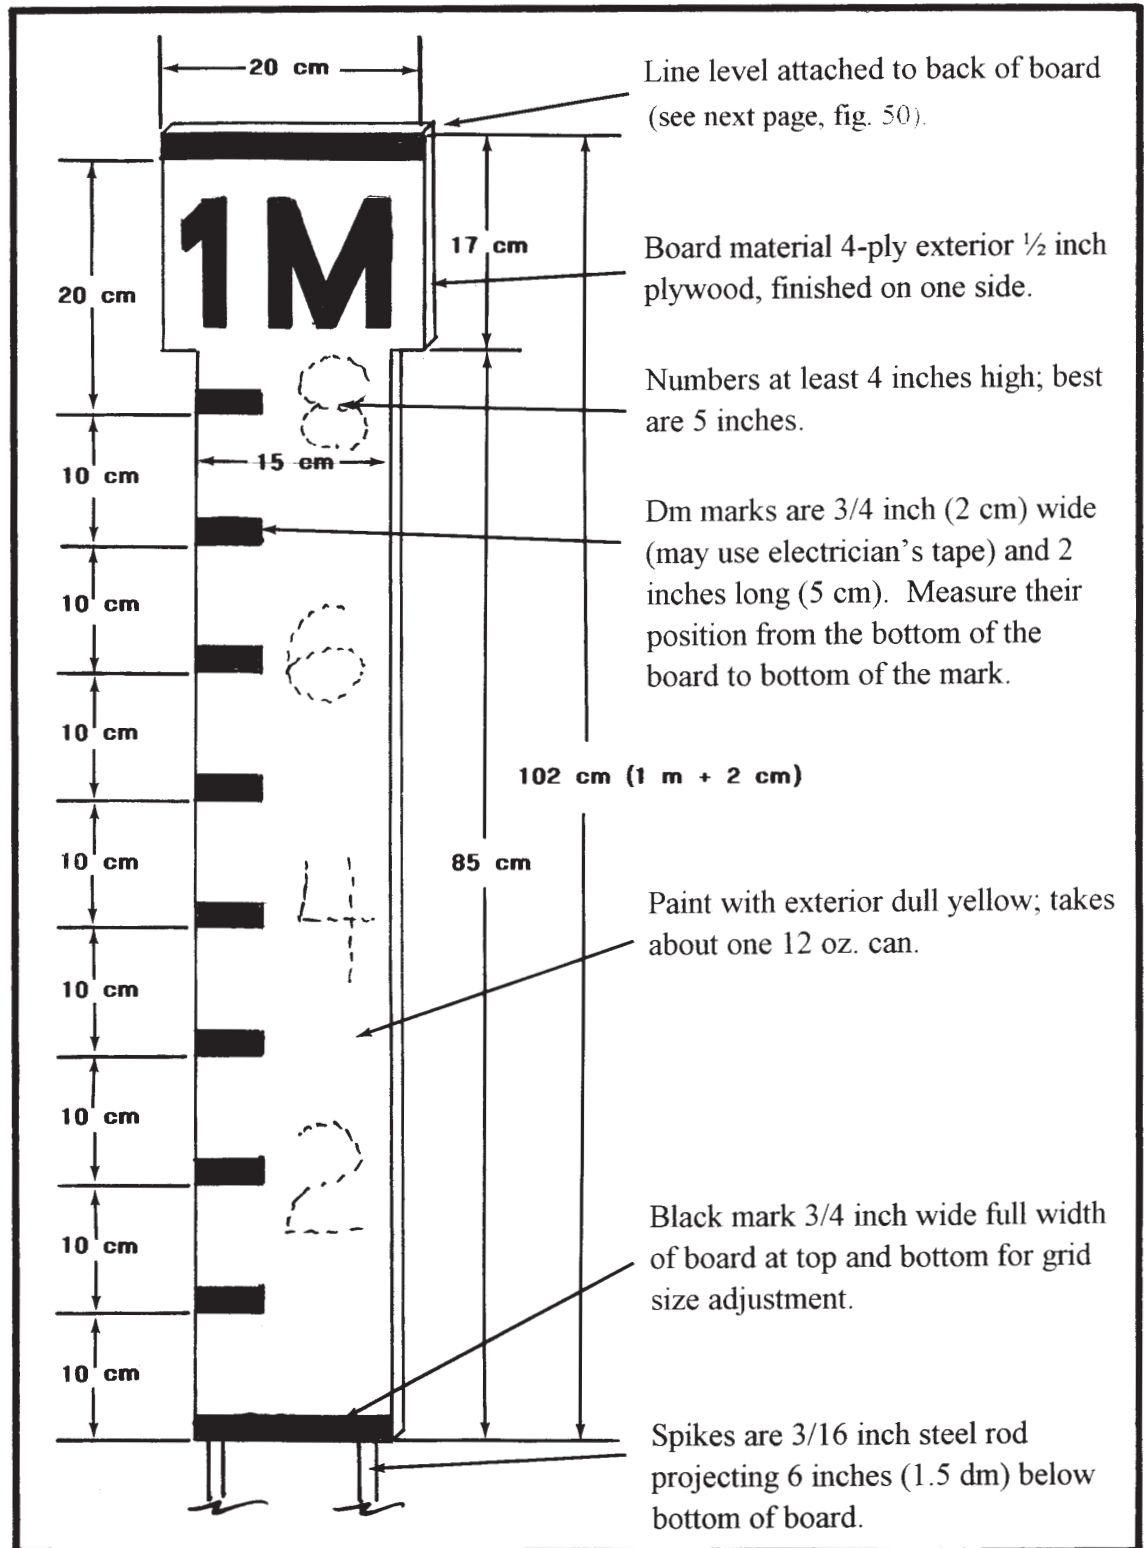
Construction details of a 1-meter-tall meter board. The same measurements are used for the 1-meter-tall folding board. A 2-meter folding board, hinged at 1 meter, has a 2-centimeter difference in board heights. See figure 54 and text for details.
